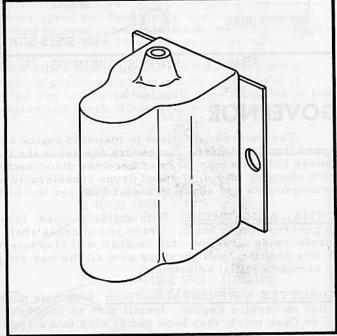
BREAKERLESS TYPE IGNITION COIL
